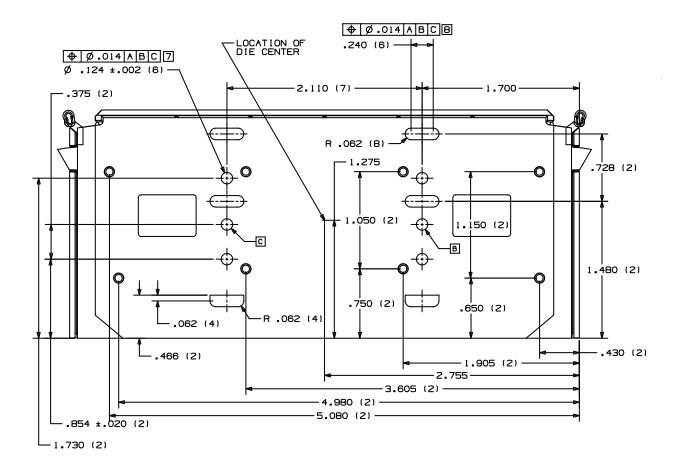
AMD Athlon™ Processor Module Dimensions-Plate Side View
